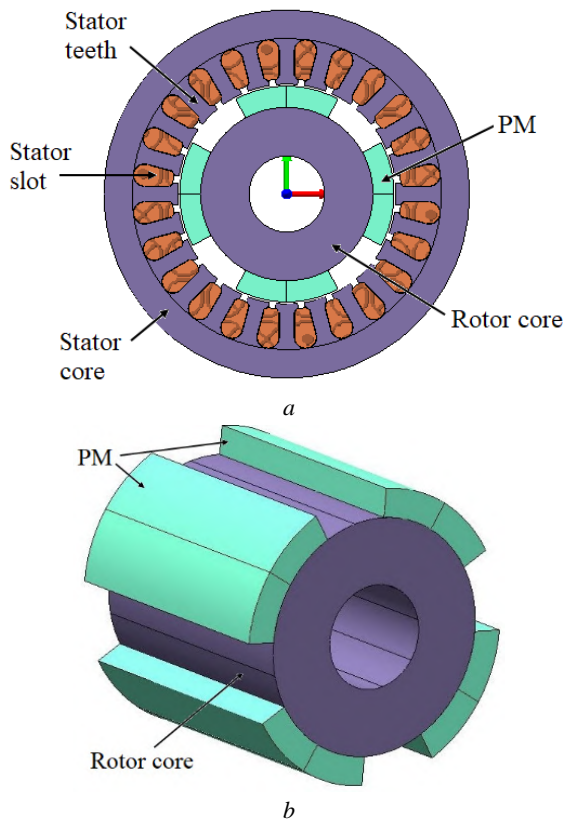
Reference radial flux PMBLDC motor: a – cross sectional view; b – 3-D view of rotor
